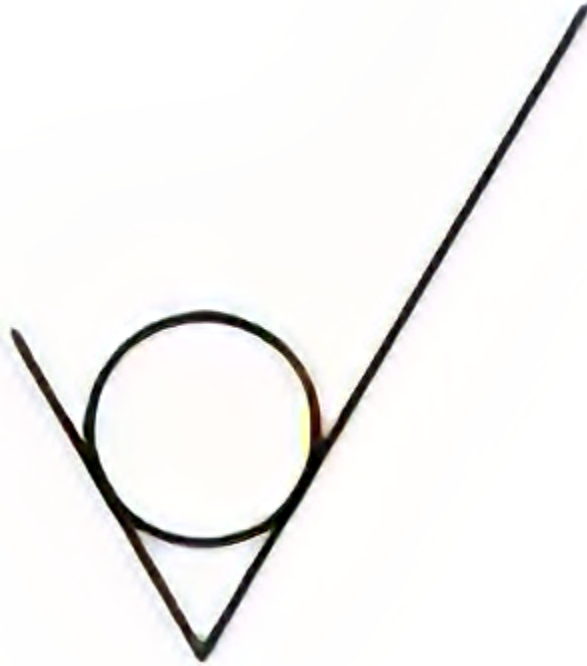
This symbol indicates no material may be removed to obtain the desired surface finish.
